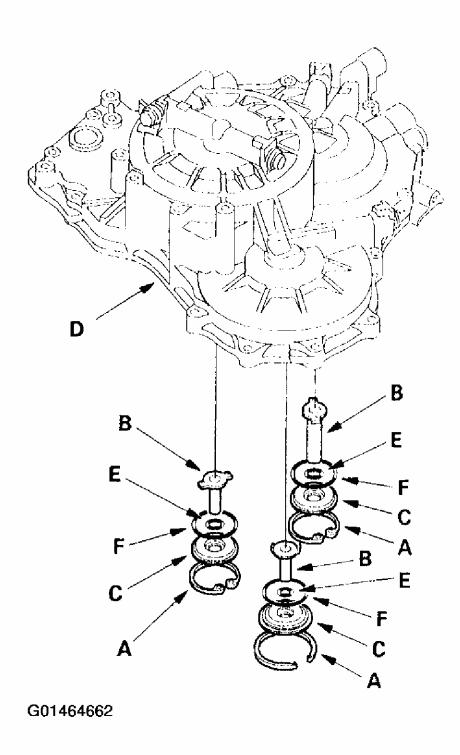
Removing The Snap Rings, ATF Feed Pipes & Feed Pipe Flanges From The End Cover
